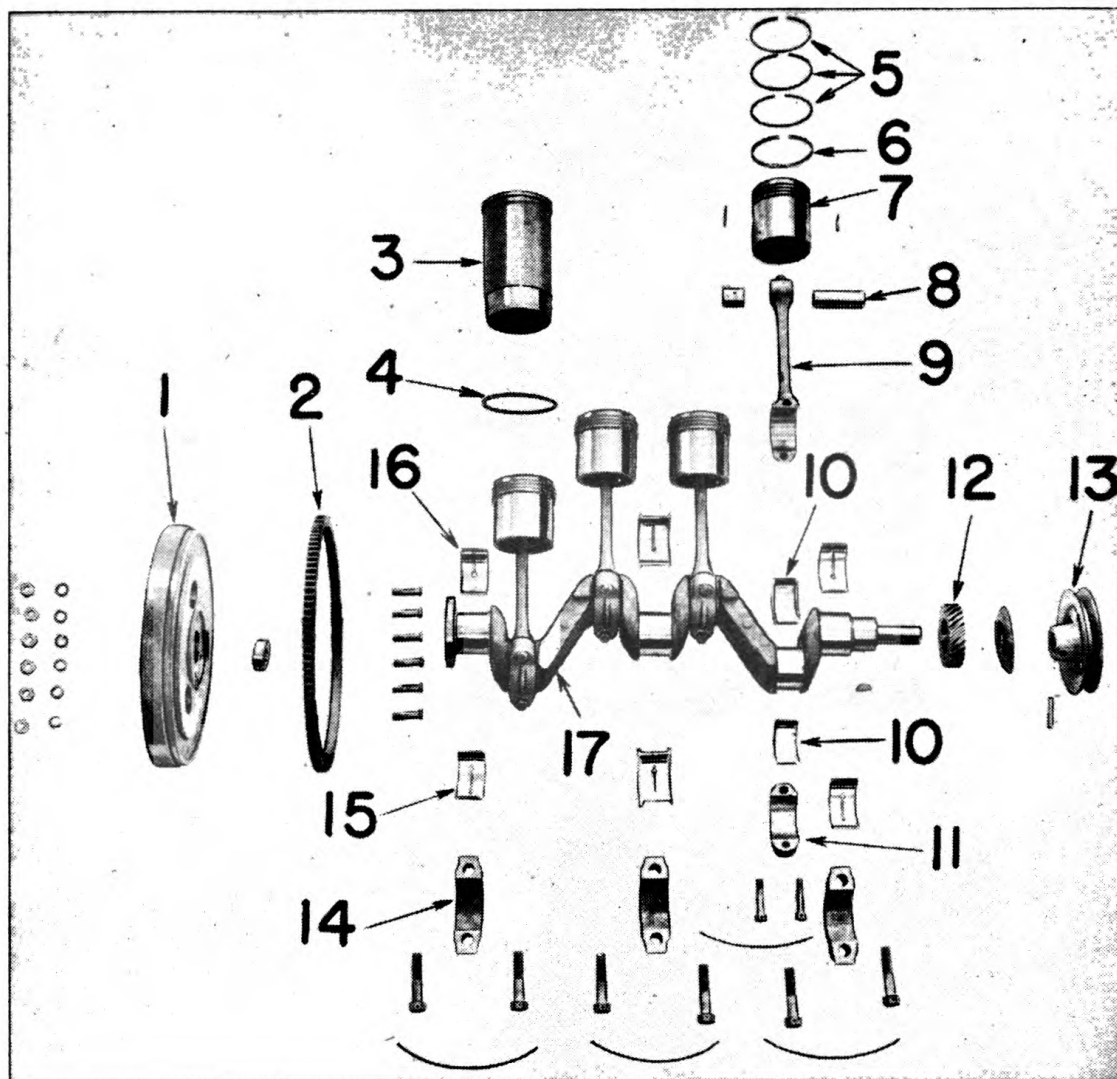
Detail of Engine Crankshaft, Connecting Rods and Pistons
